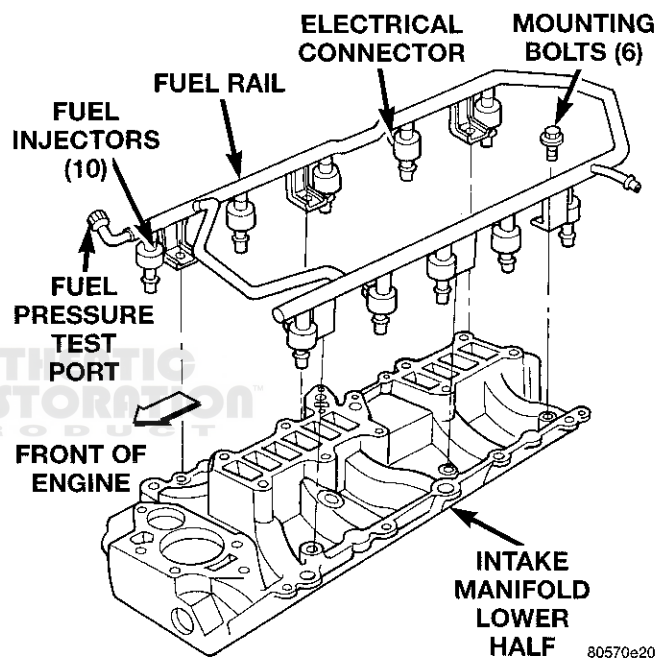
Fuel Rail Mounting Bolts—8.0L V-10 Engine—Typical
